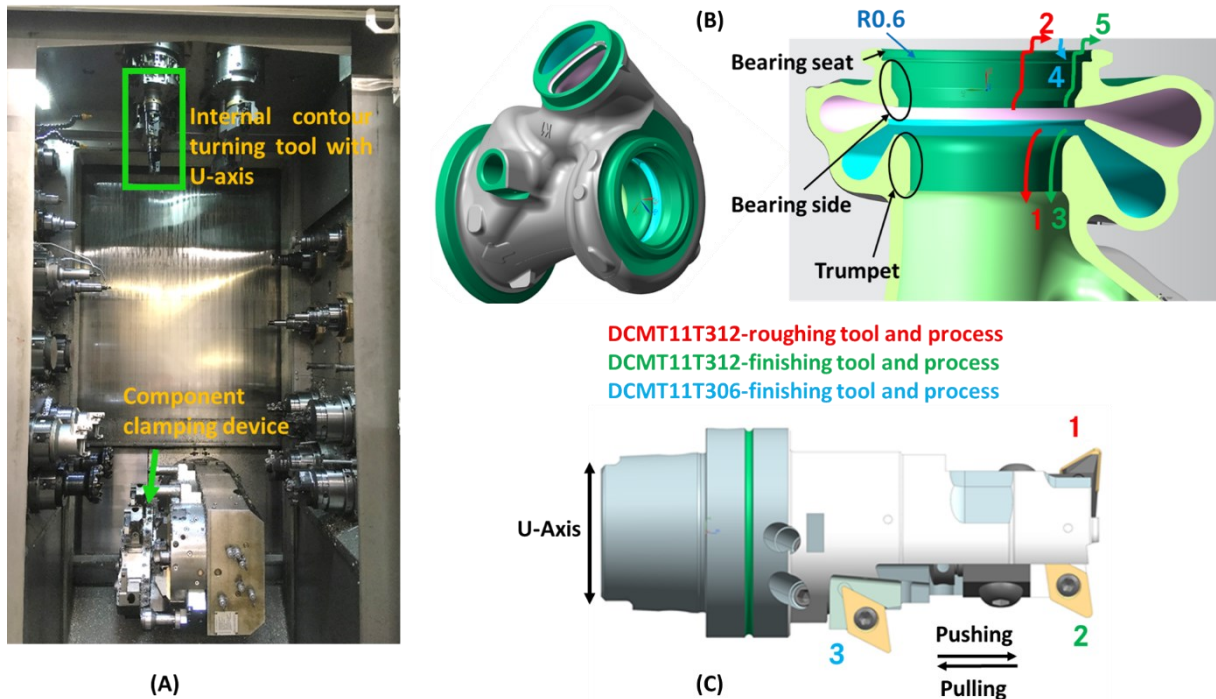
(A) Turbine housing machining in a multi-spindle transfer center, (B) Full and Cross-sectional CAD model of Turbine housing and (C) Inner contour turning tool
